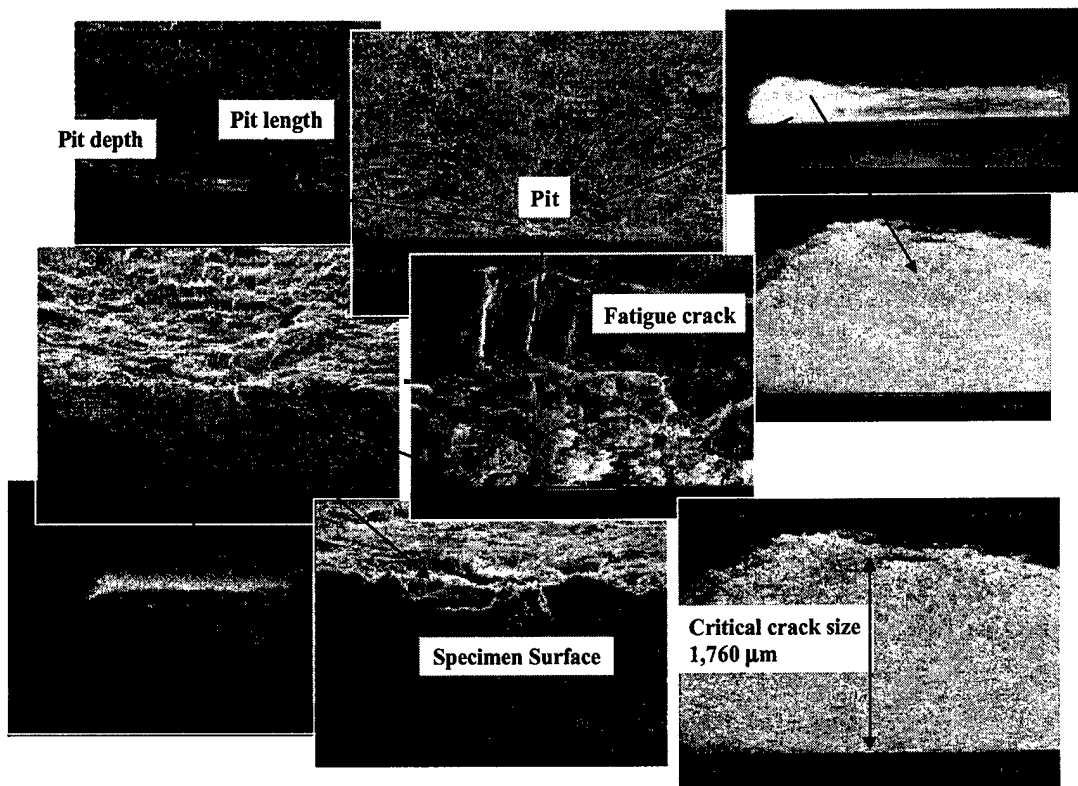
Fracture Surface of Specimen 43-1 Showing Single Crack-Nucleating Pit and the Critical Crack
